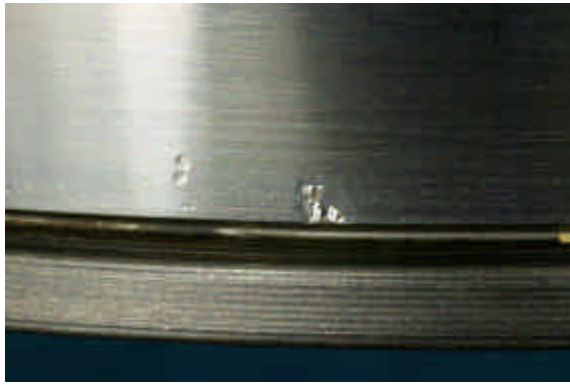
Surface spalling found on the inner race of the position-three inboard bearing.
